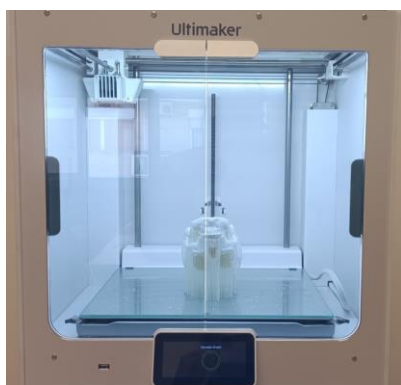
Cranial model 3D printed with the Ultimaker S5 Pro Bundle assumed as the gold standard.
